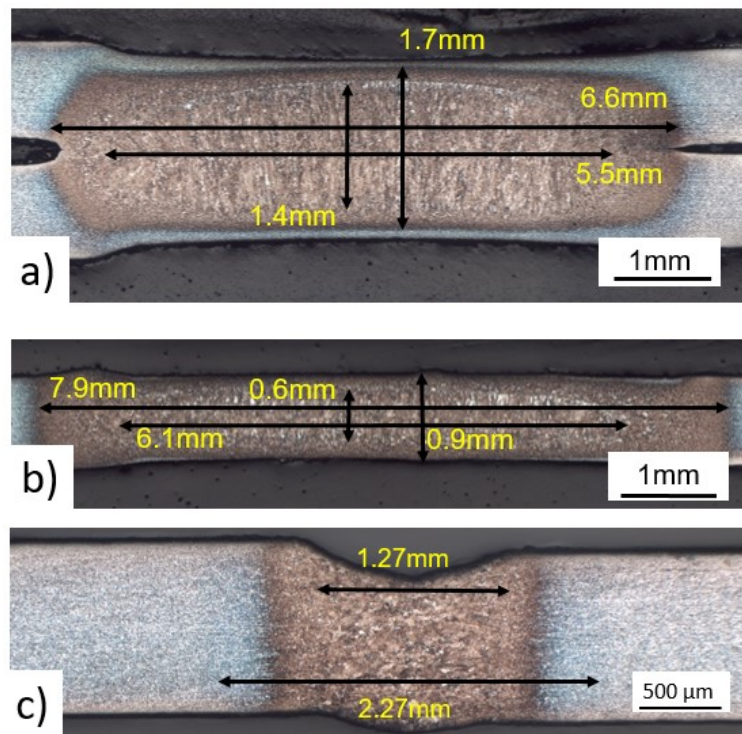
Macrostructure of welded joint of DP600: (a) RSW of two plates; (b) reproduced WM of RSW of one plate; (c) LBW.
